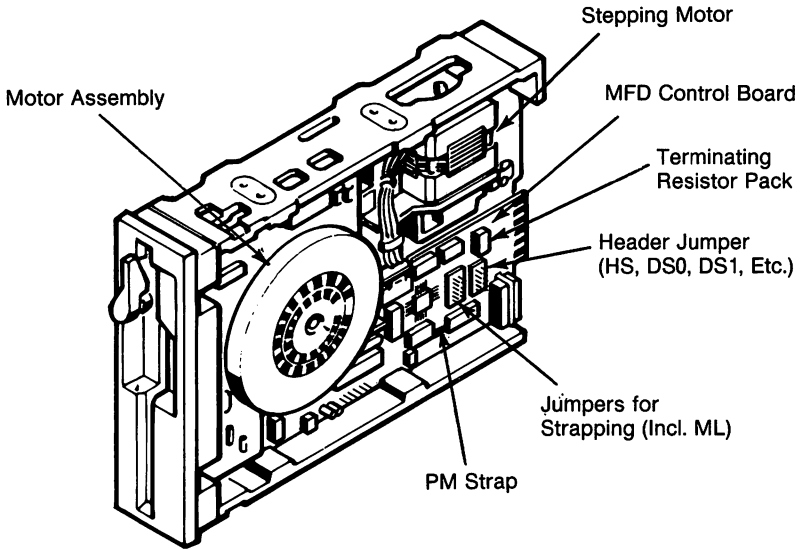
Disk Drive and Disk Drive Jumper Locations
